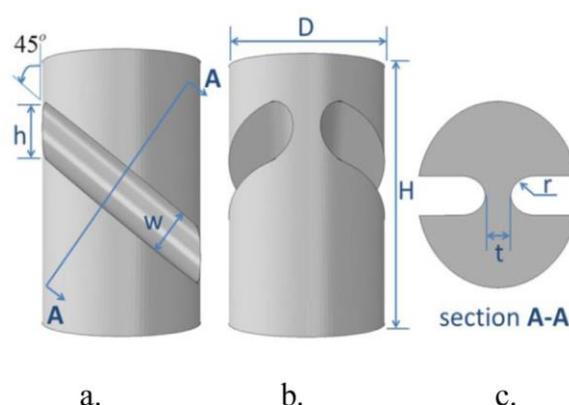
Shear-compression specimen. a. Front view b. Side view. c. A cut view (A-A) perpendicular to the gauge inclination.
